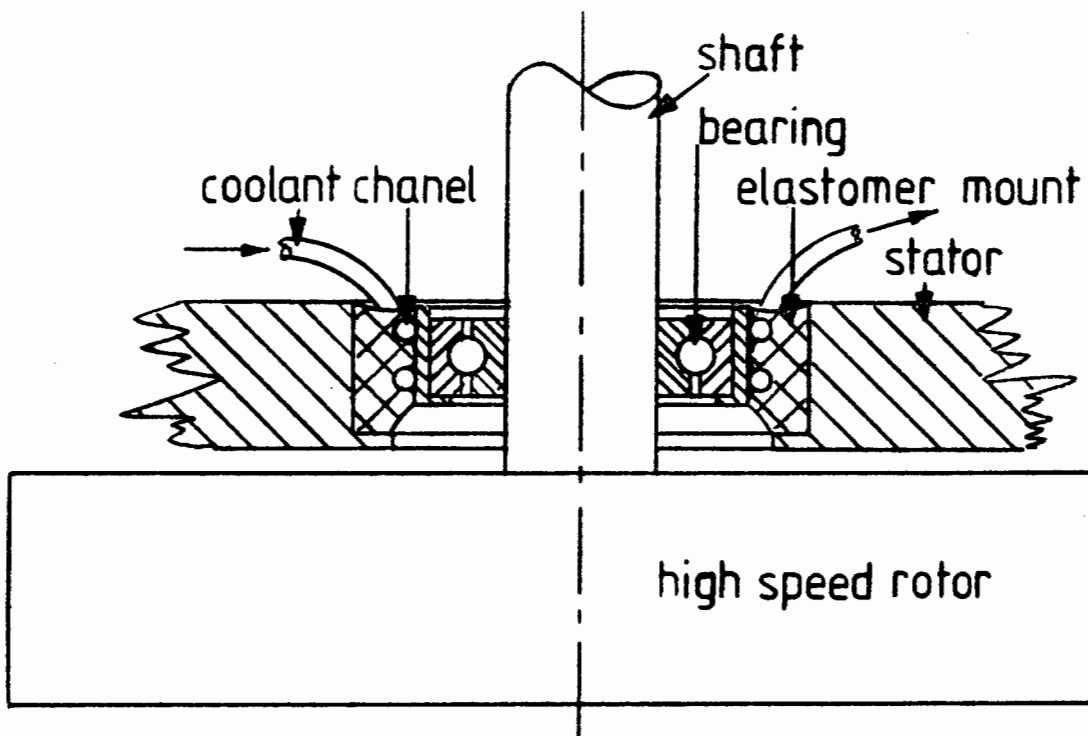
RESILIENTLY MOUNTED BALL BEARING
